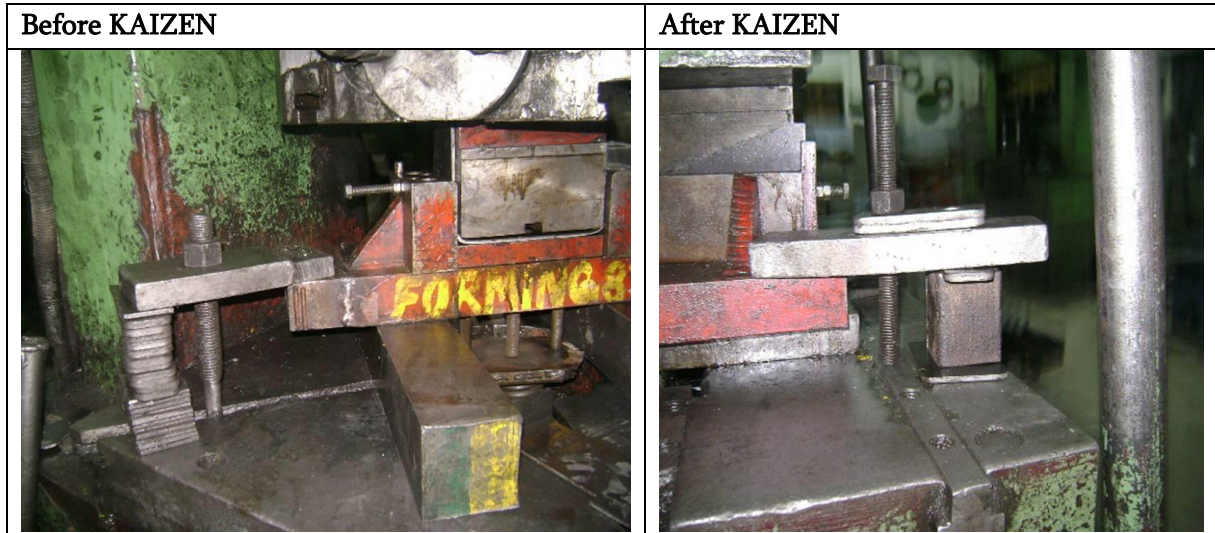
Clamping block introduced instead of packing plates by using KAIZEN
